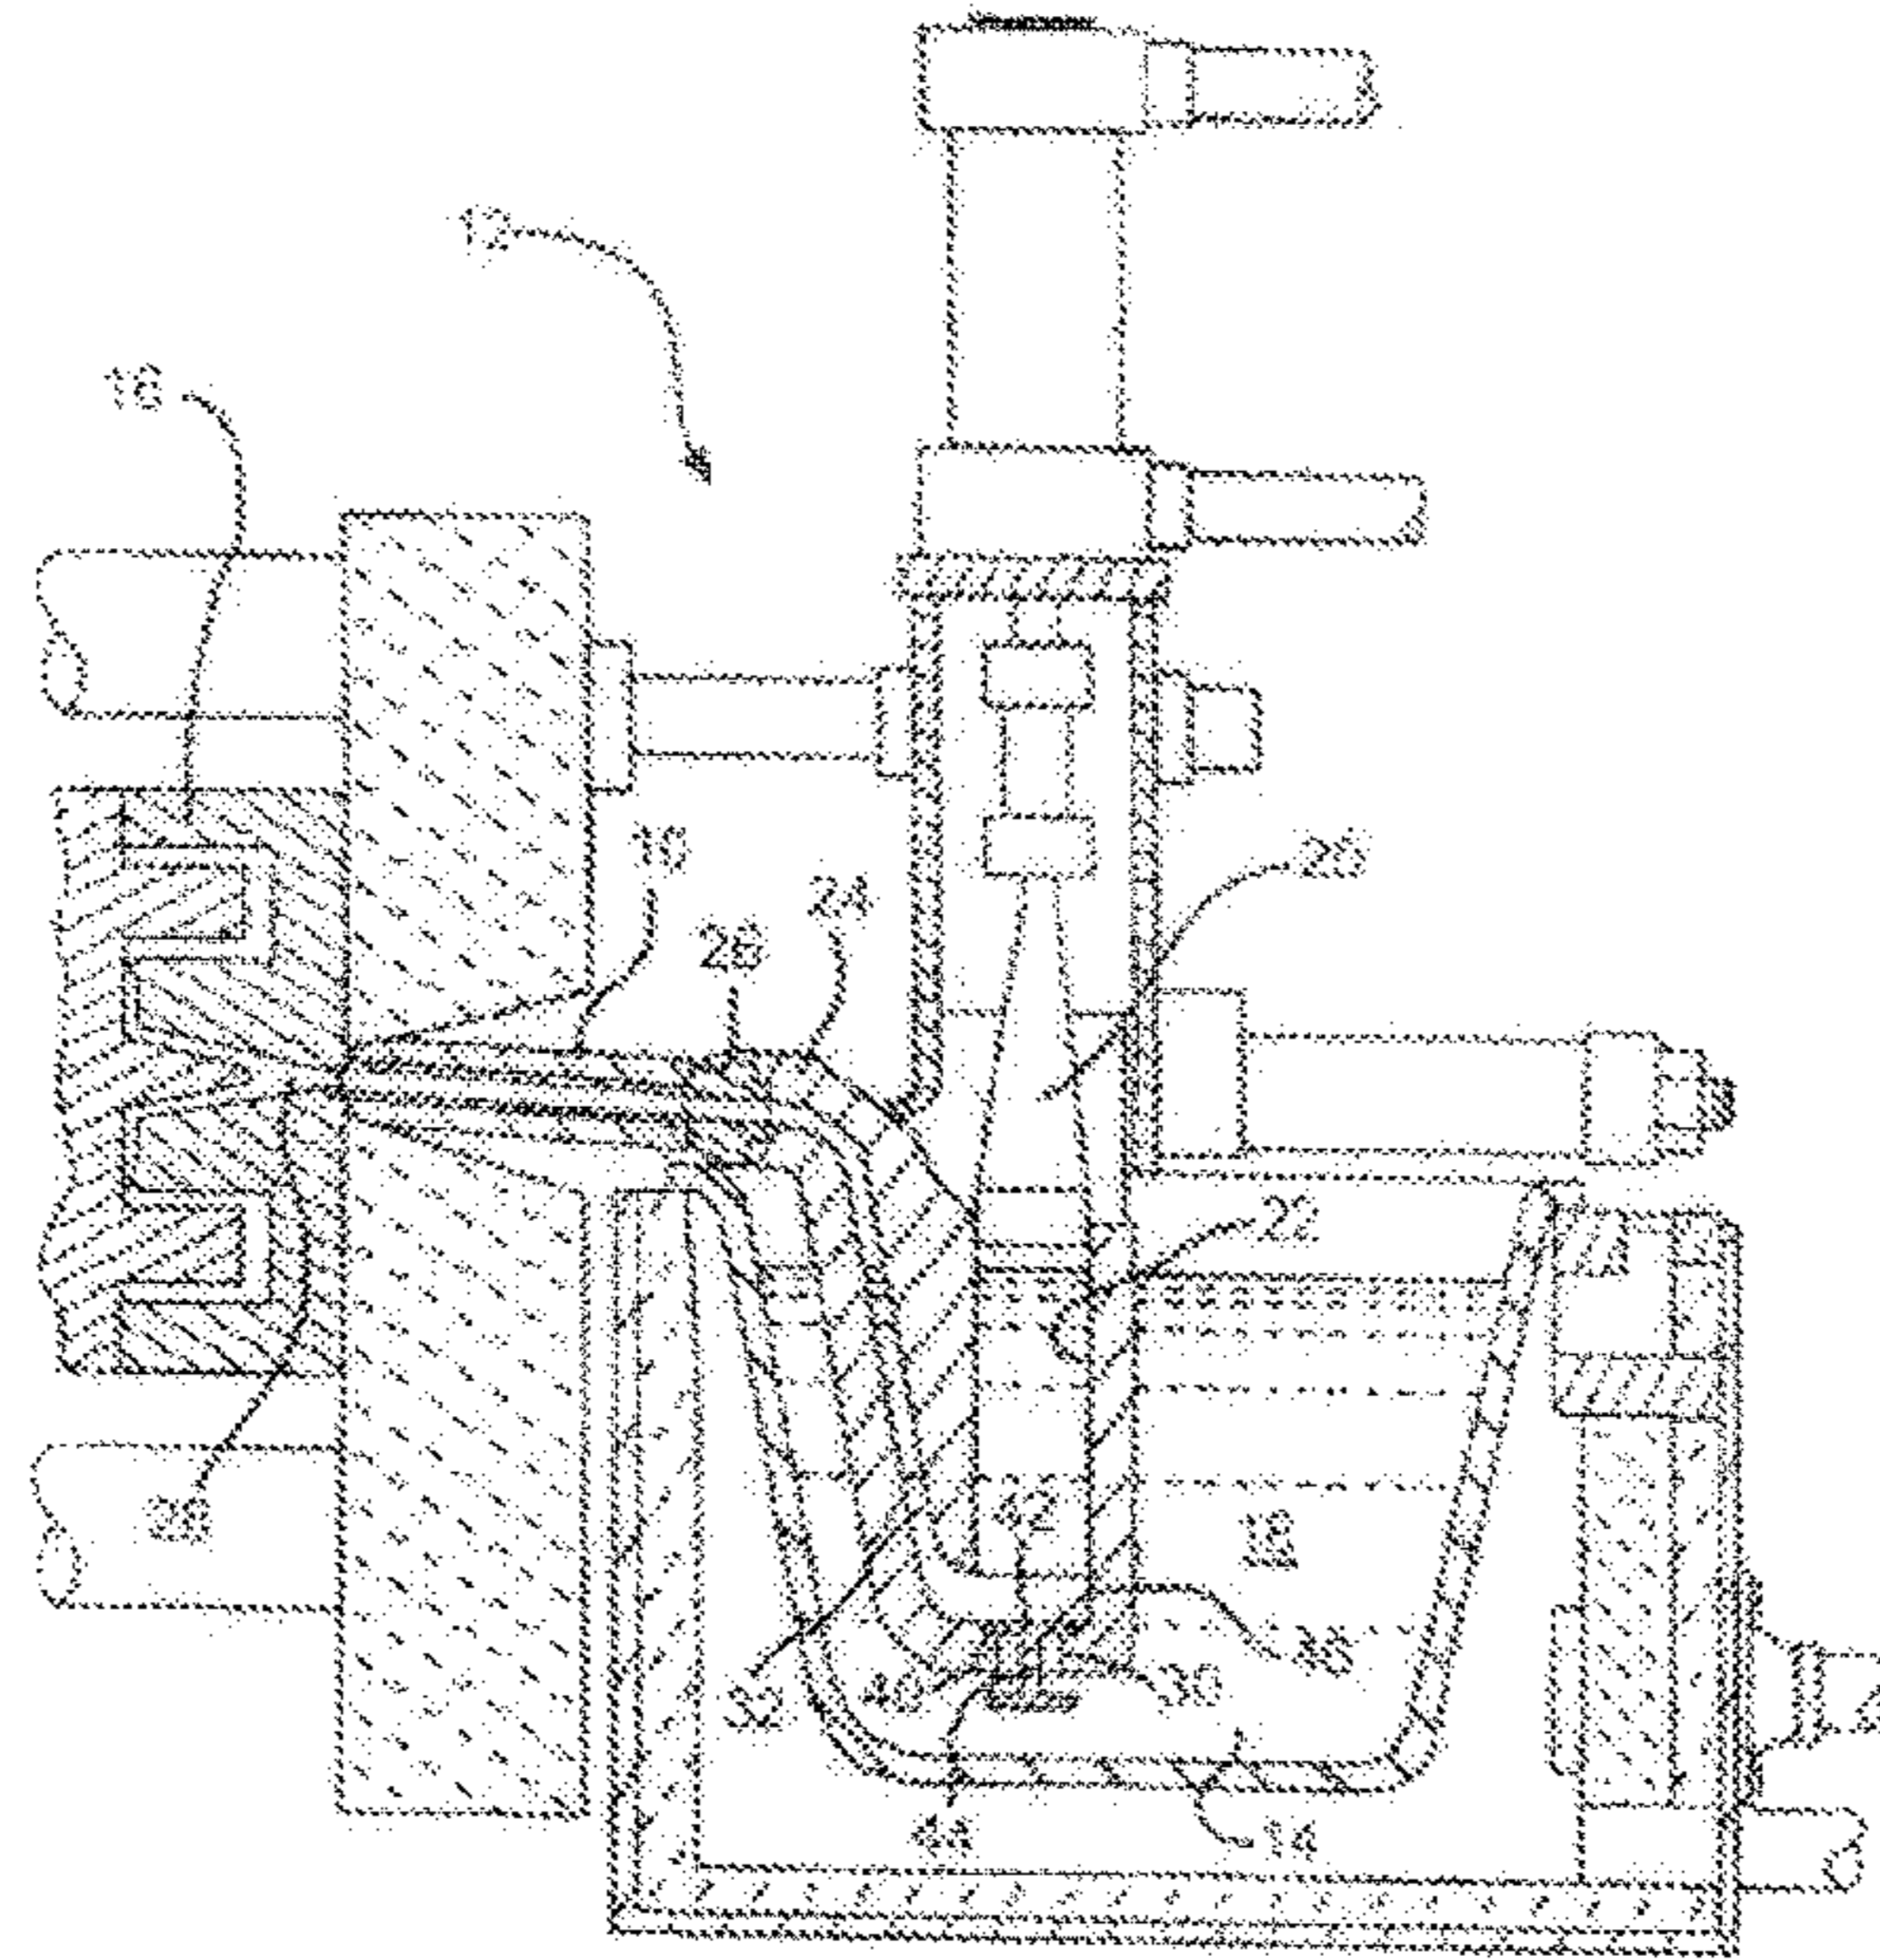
Hot Chamber Die Casting Machine (Prior Art)
